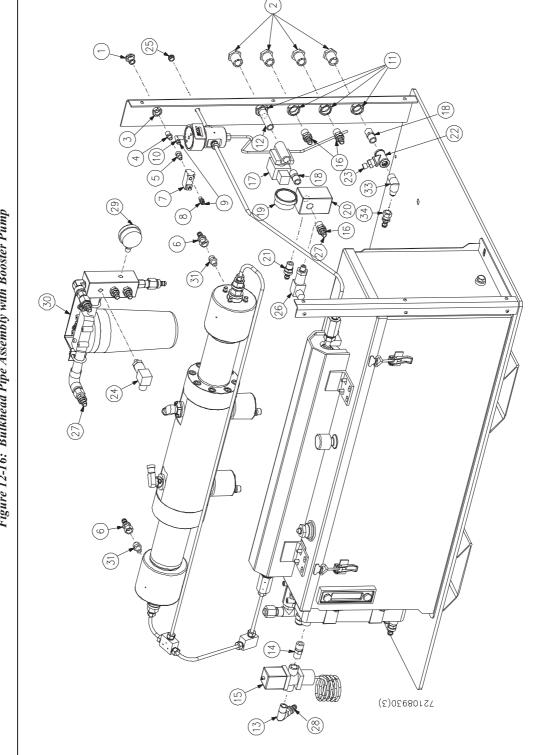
Bulkhead Pipe Assembly with Booster Pump
